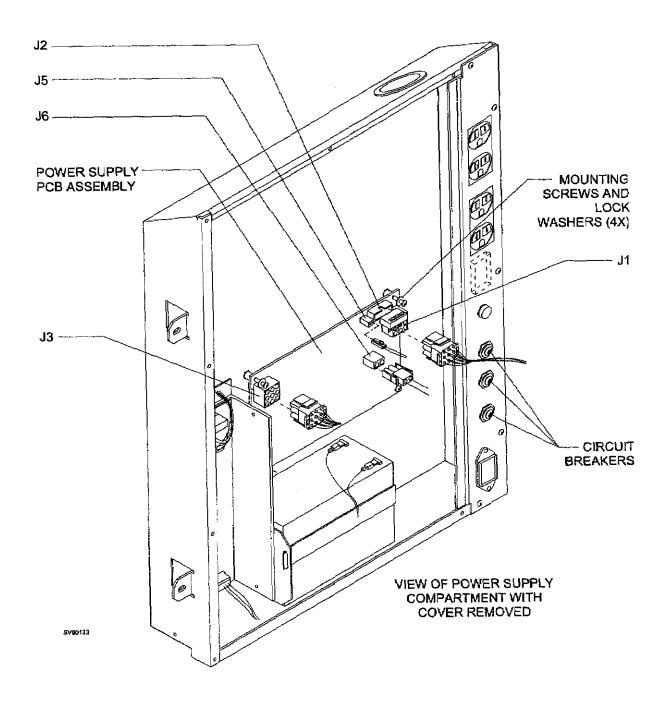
POWER SUPPLY PCB ASSEMBLY REPLACEMENT
